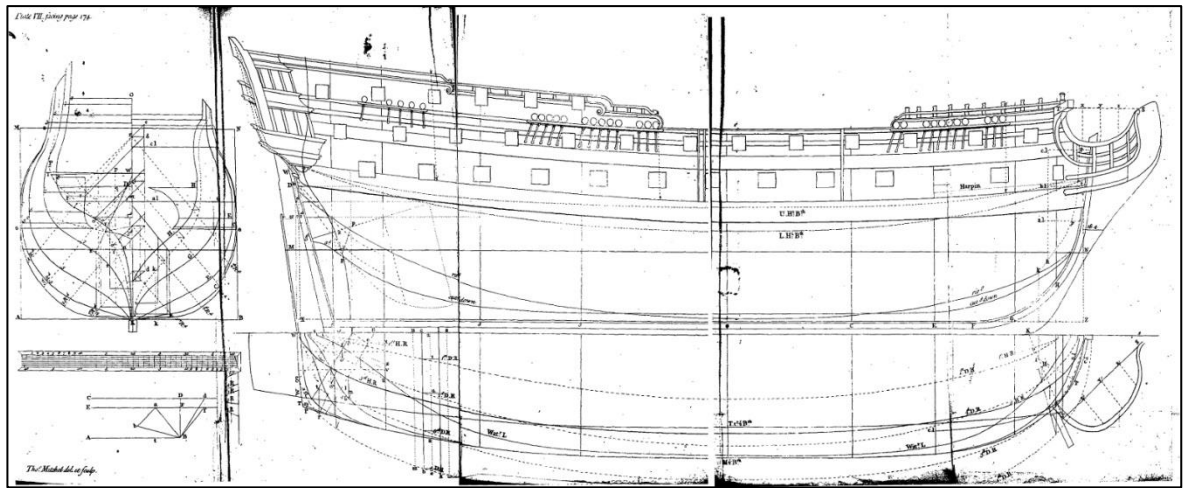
Plate VII. (Murray, M. 1764. *A Treatise on Ship-Building and Navigation*. p.174)
